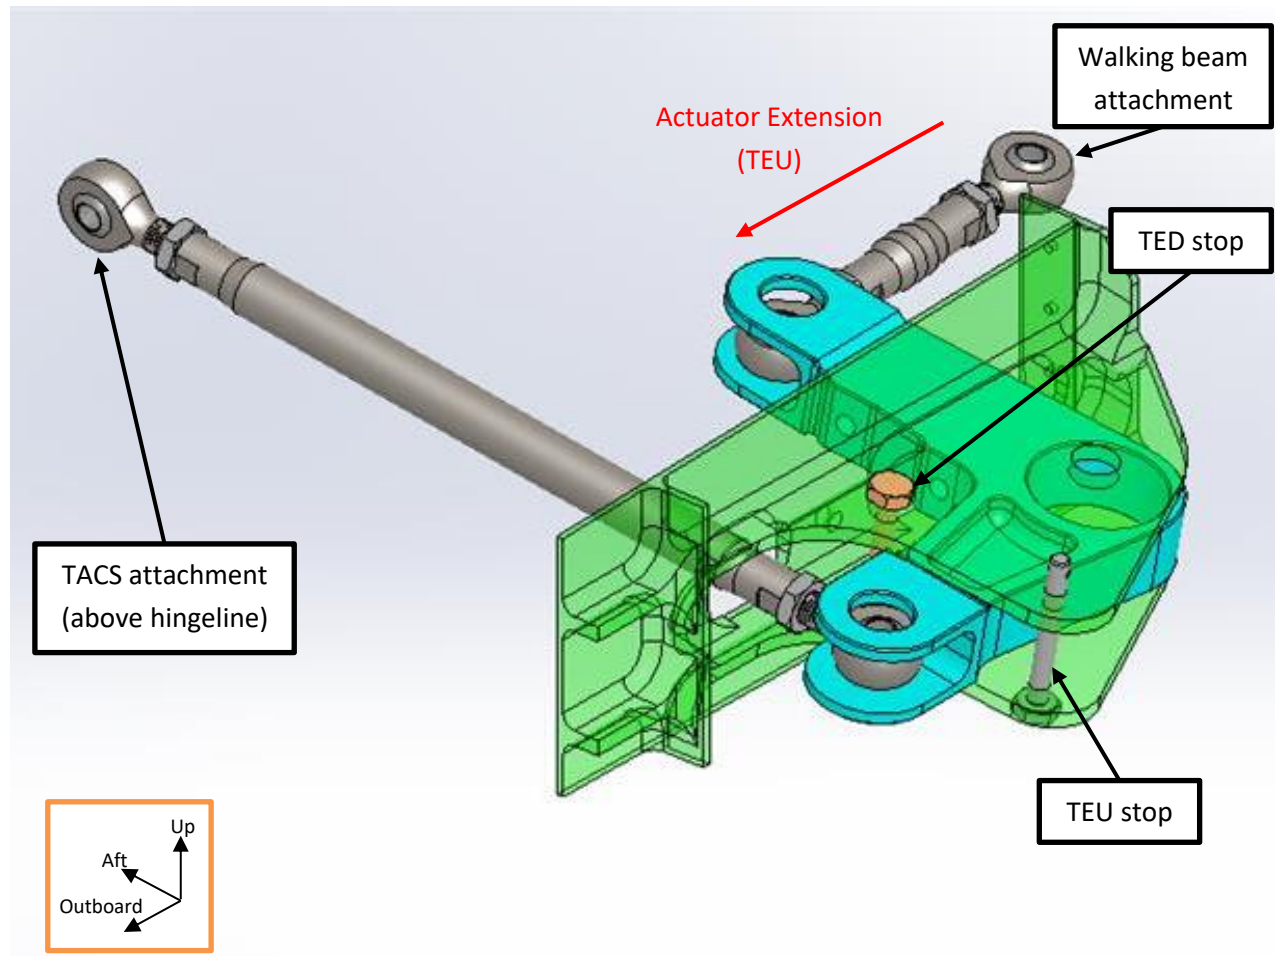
Bell crank assembly view (simplified, RH shown)
